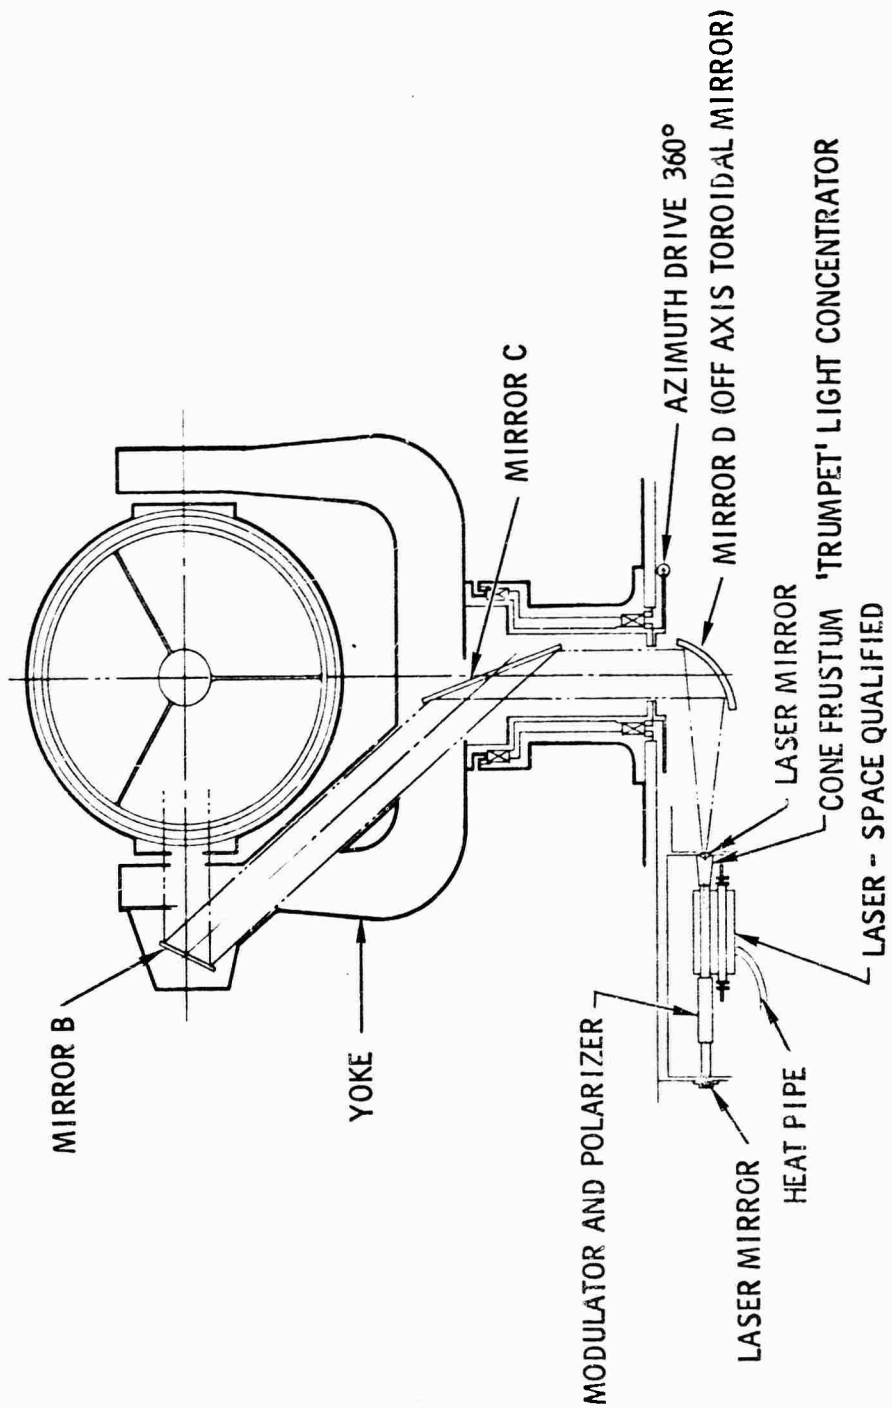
Sun Pumped Laser Design Employing Coude Optical Relay System
